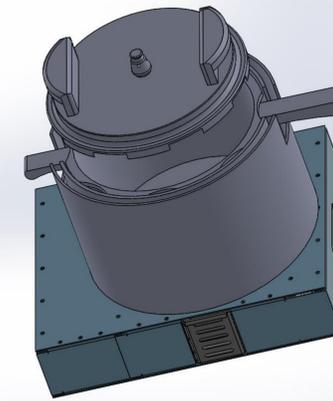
The assembly of the pressure cooker inside its hub and hybrid heating base.
